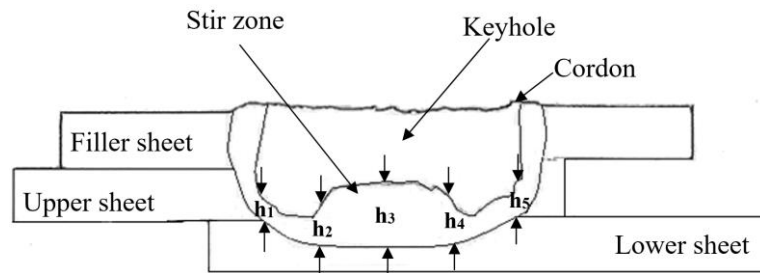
The cross-sectional schematic view of the FSSW joint.
